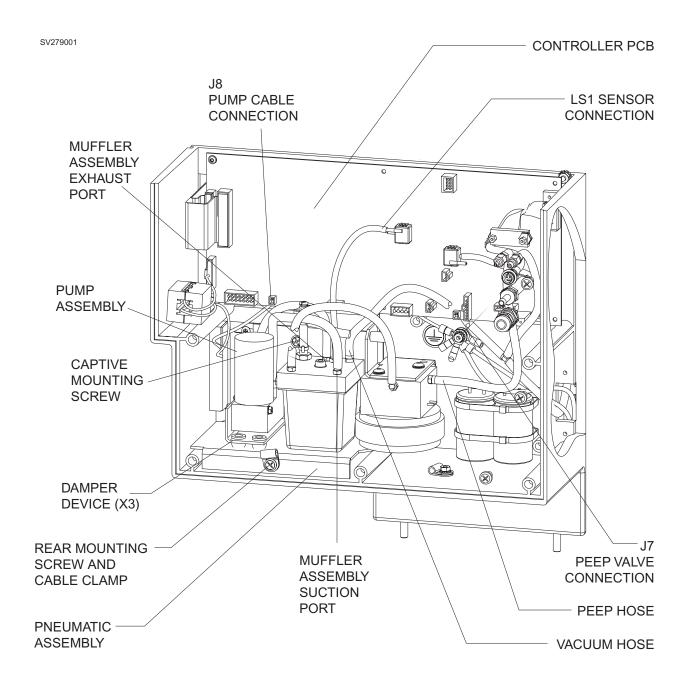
Removal of Pneumatic Assembly and Motor Pump
